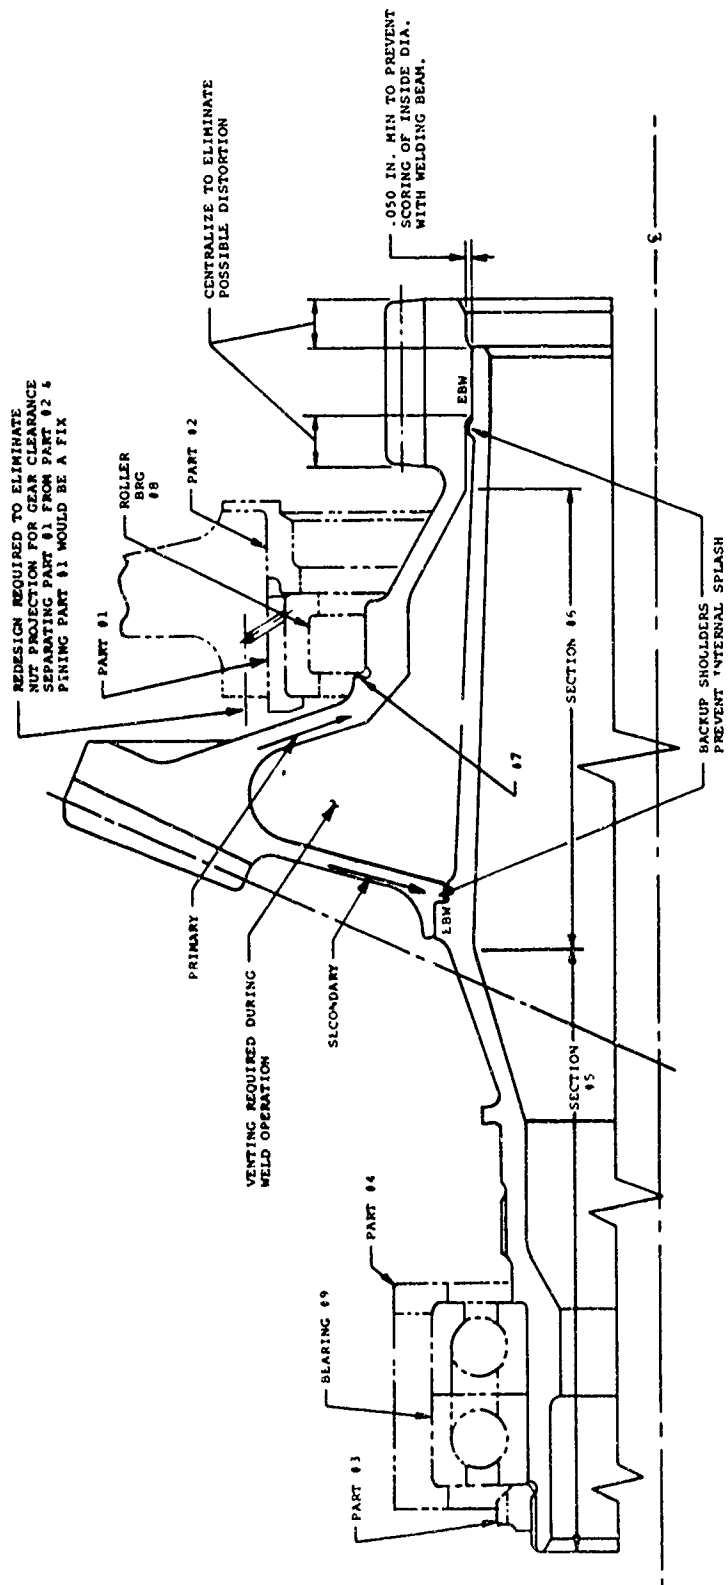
CH-47 Forward Transmission Redundant Single Bearing Gear/Sun Gear (Full Scale).
